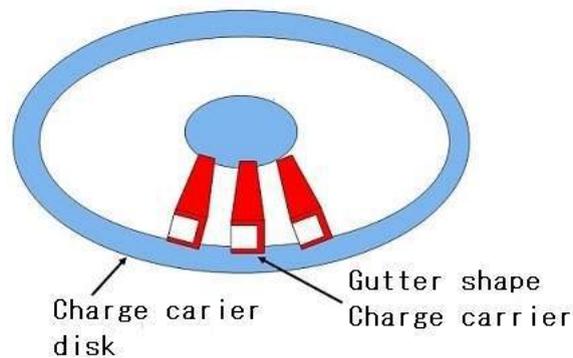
Horizontally placed gutter shape charge carrier on the charge carrier disk
